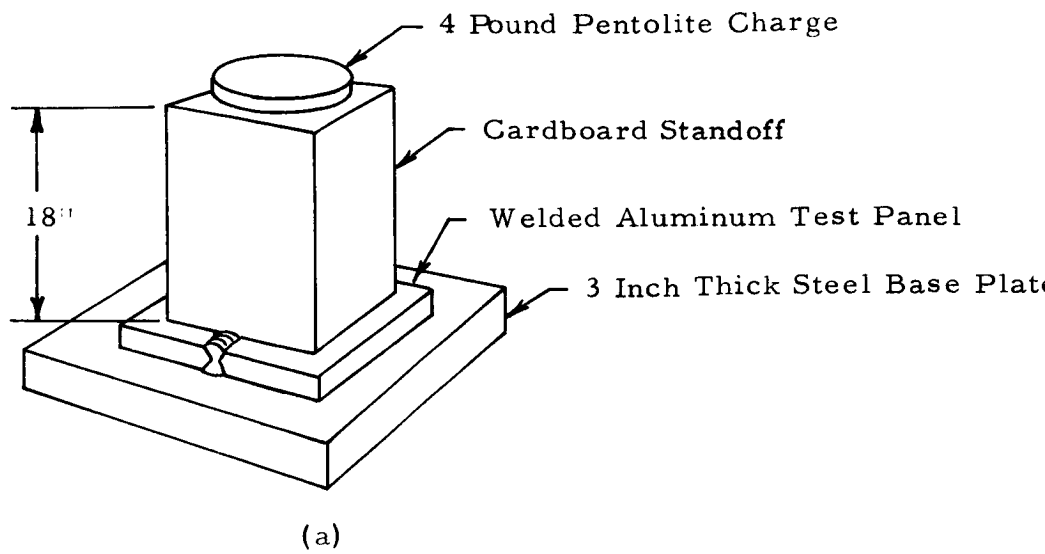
EXPLOSIVE IMPACT LOADING OF BUTT-WELDED TEST PANELS
